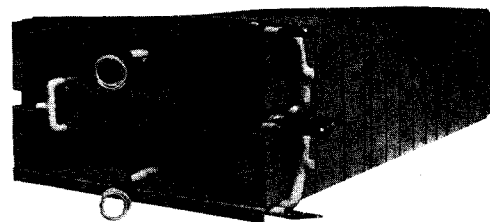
ASSEMBLED GROUP OF COILS AND INSULATION FOR A SHELL FORM TRANSFORMER
